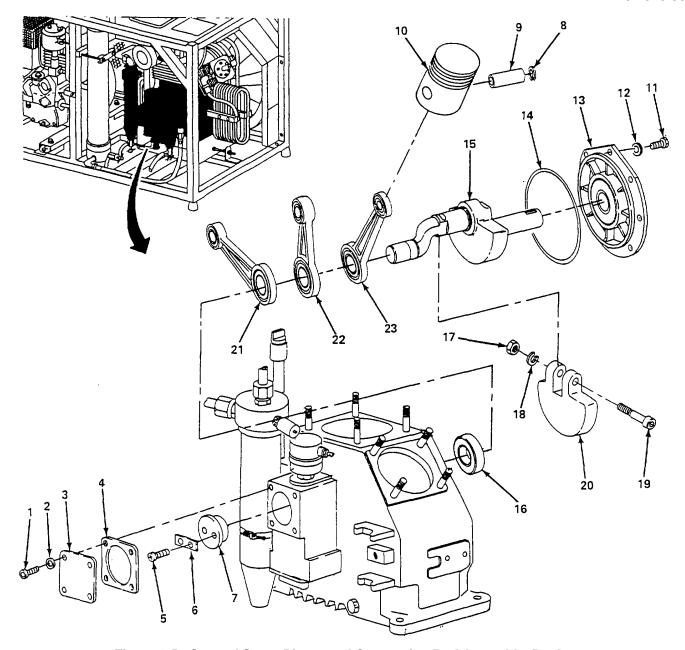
Second Stage Piston and Connecting Rod Assembly, Replace.
